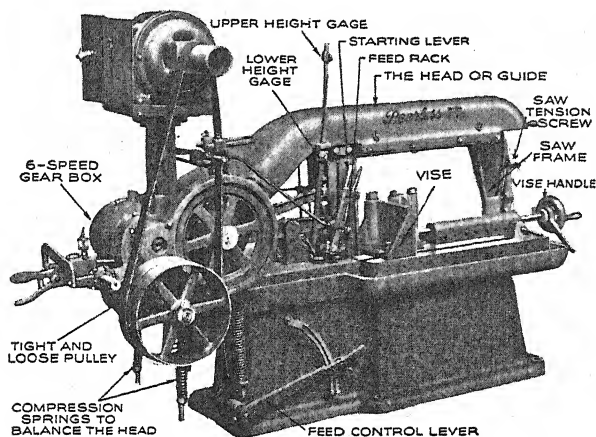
The Peerless High-Speed Standard-Type Metal-Sawing Machine.
